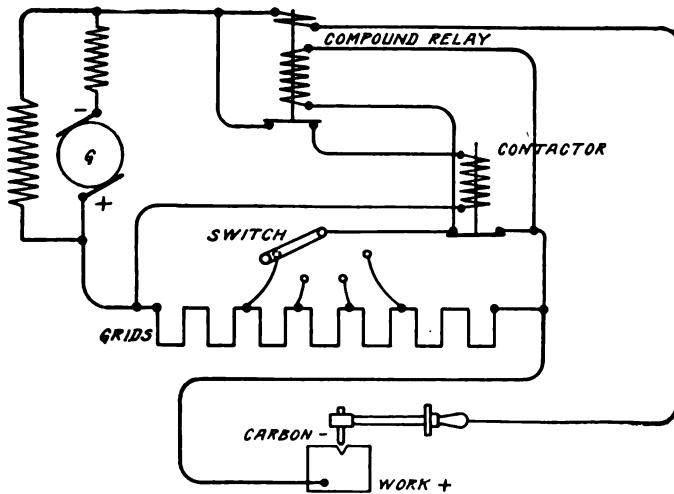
Wiring Diagram for General Electric Welding System
